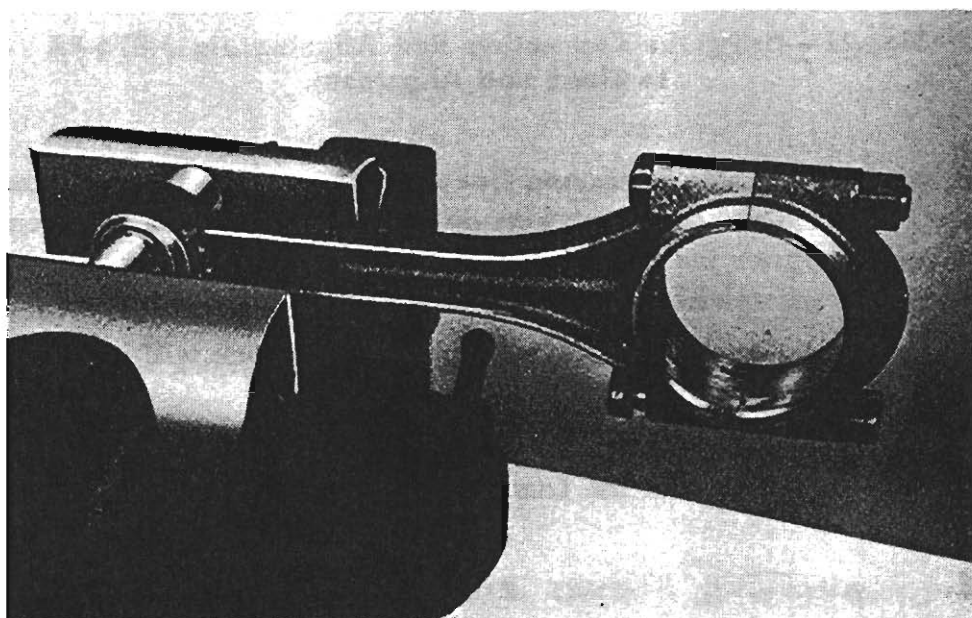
The Connecting Rod Should Remain in a Horizontal Position Until Tapped Downward by Hand.
